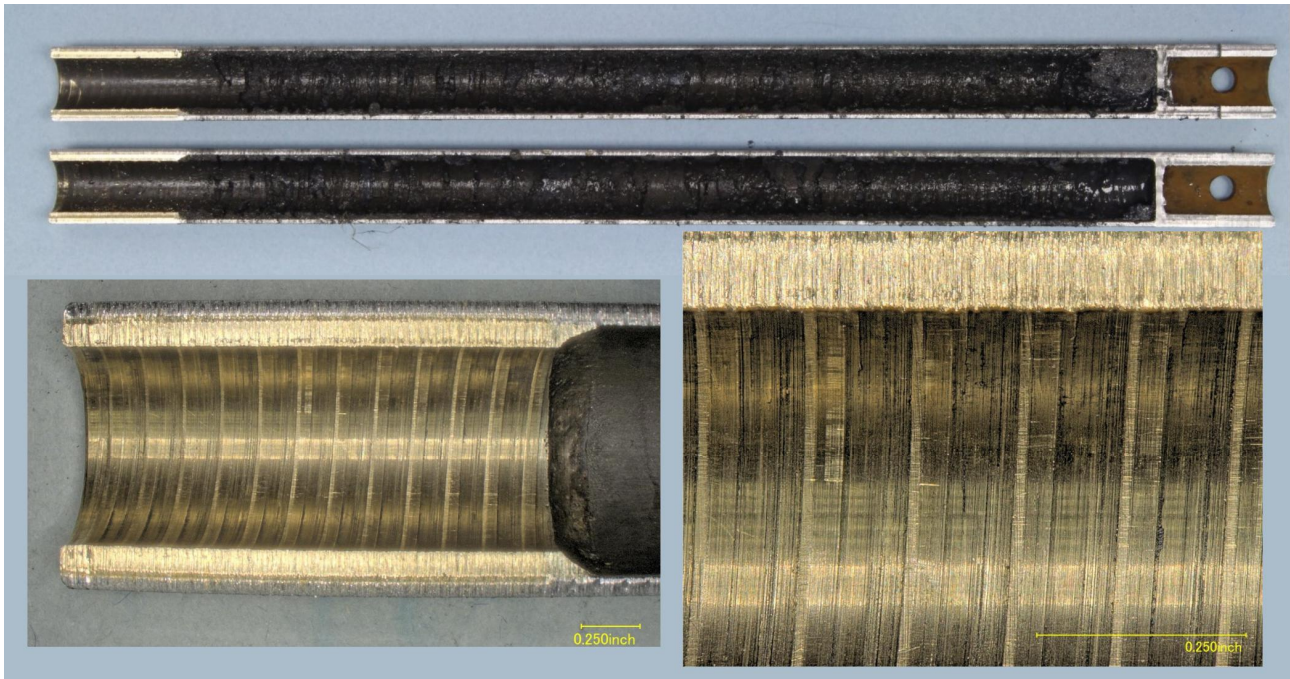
Actuator nut assembly (number 9 in Figure 2) sawn open. The dark substance inside the tube is lubricating grease. After cleaning, a close-up photo of the aluminium bronze part shows that the threads were worn before they were cut off. (Photos: NTSB, Materials Laboratory Report No. 16-020B)
